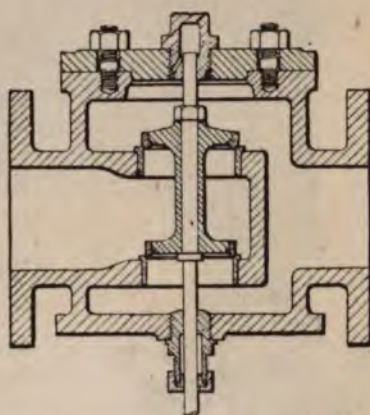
Section of Throttle Valve with equilibrium moving member, made by Messrs. Alley & Maclellan.
